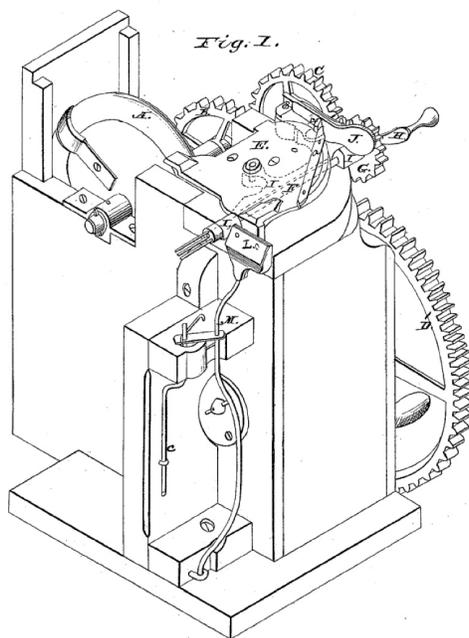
Levi Van Hoesen's Apple Paring and Slicing Machine Patent Drawing
